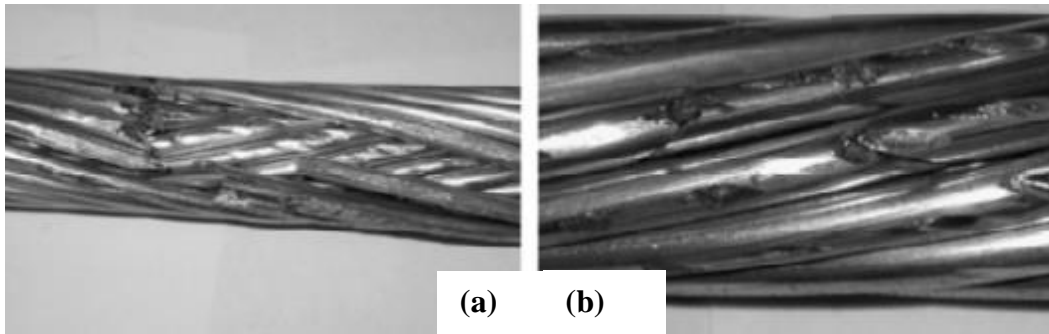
Fretting fatigue of conductor: (a) intense surface wear, fracture of some aluminium wires in the outer layer of the ACSR conductor; and (b) elliptical fretting marks and wire break of the inner layer of the ACSR conductor (Azevedo *et al.*, 2009)
